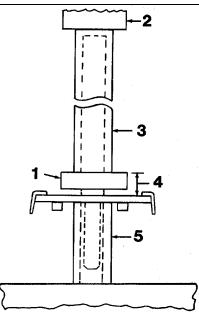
Removing Tachometer Drive Bearing Using SE-1336-16 Bearing Puller
